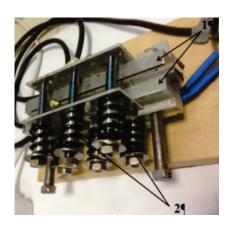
Photography of the tool that used for fabrication of joints (1-metallic heater which clamps the CC samples; 2-springs which provide compressive force).
